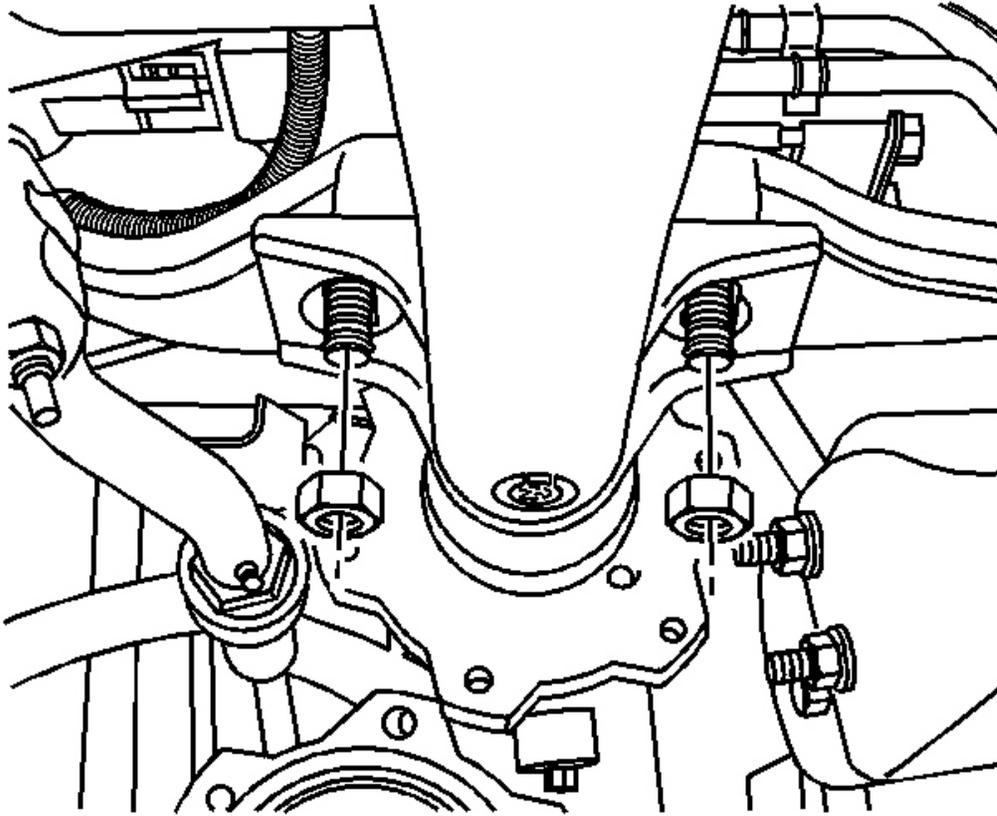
Front Drive Inner Axle Shaft Housing Nuts
